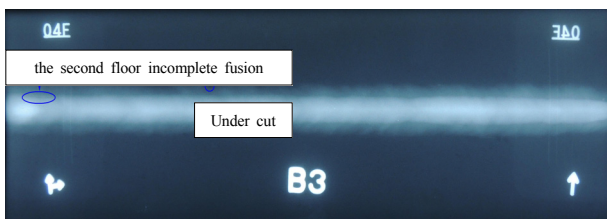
X-ray Radiographic test film of welding specimen to 4pass at CO₂ 100% in 25 L/min
